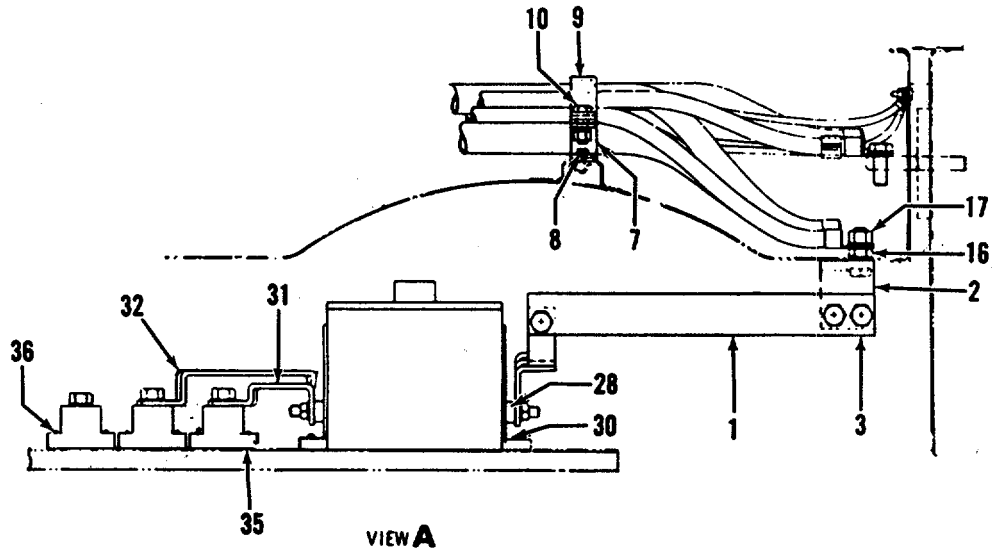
Engine and chassis harness installation (Sheet 2 of 2)
